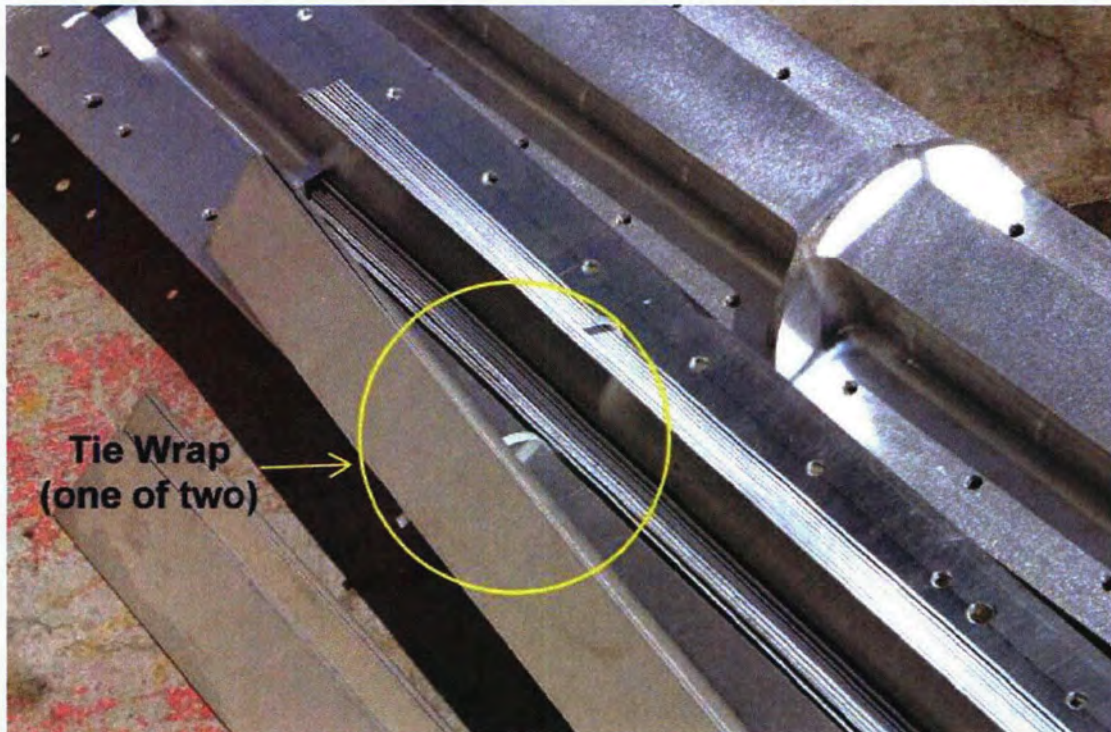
CD3-2 - Failed tie wraps
